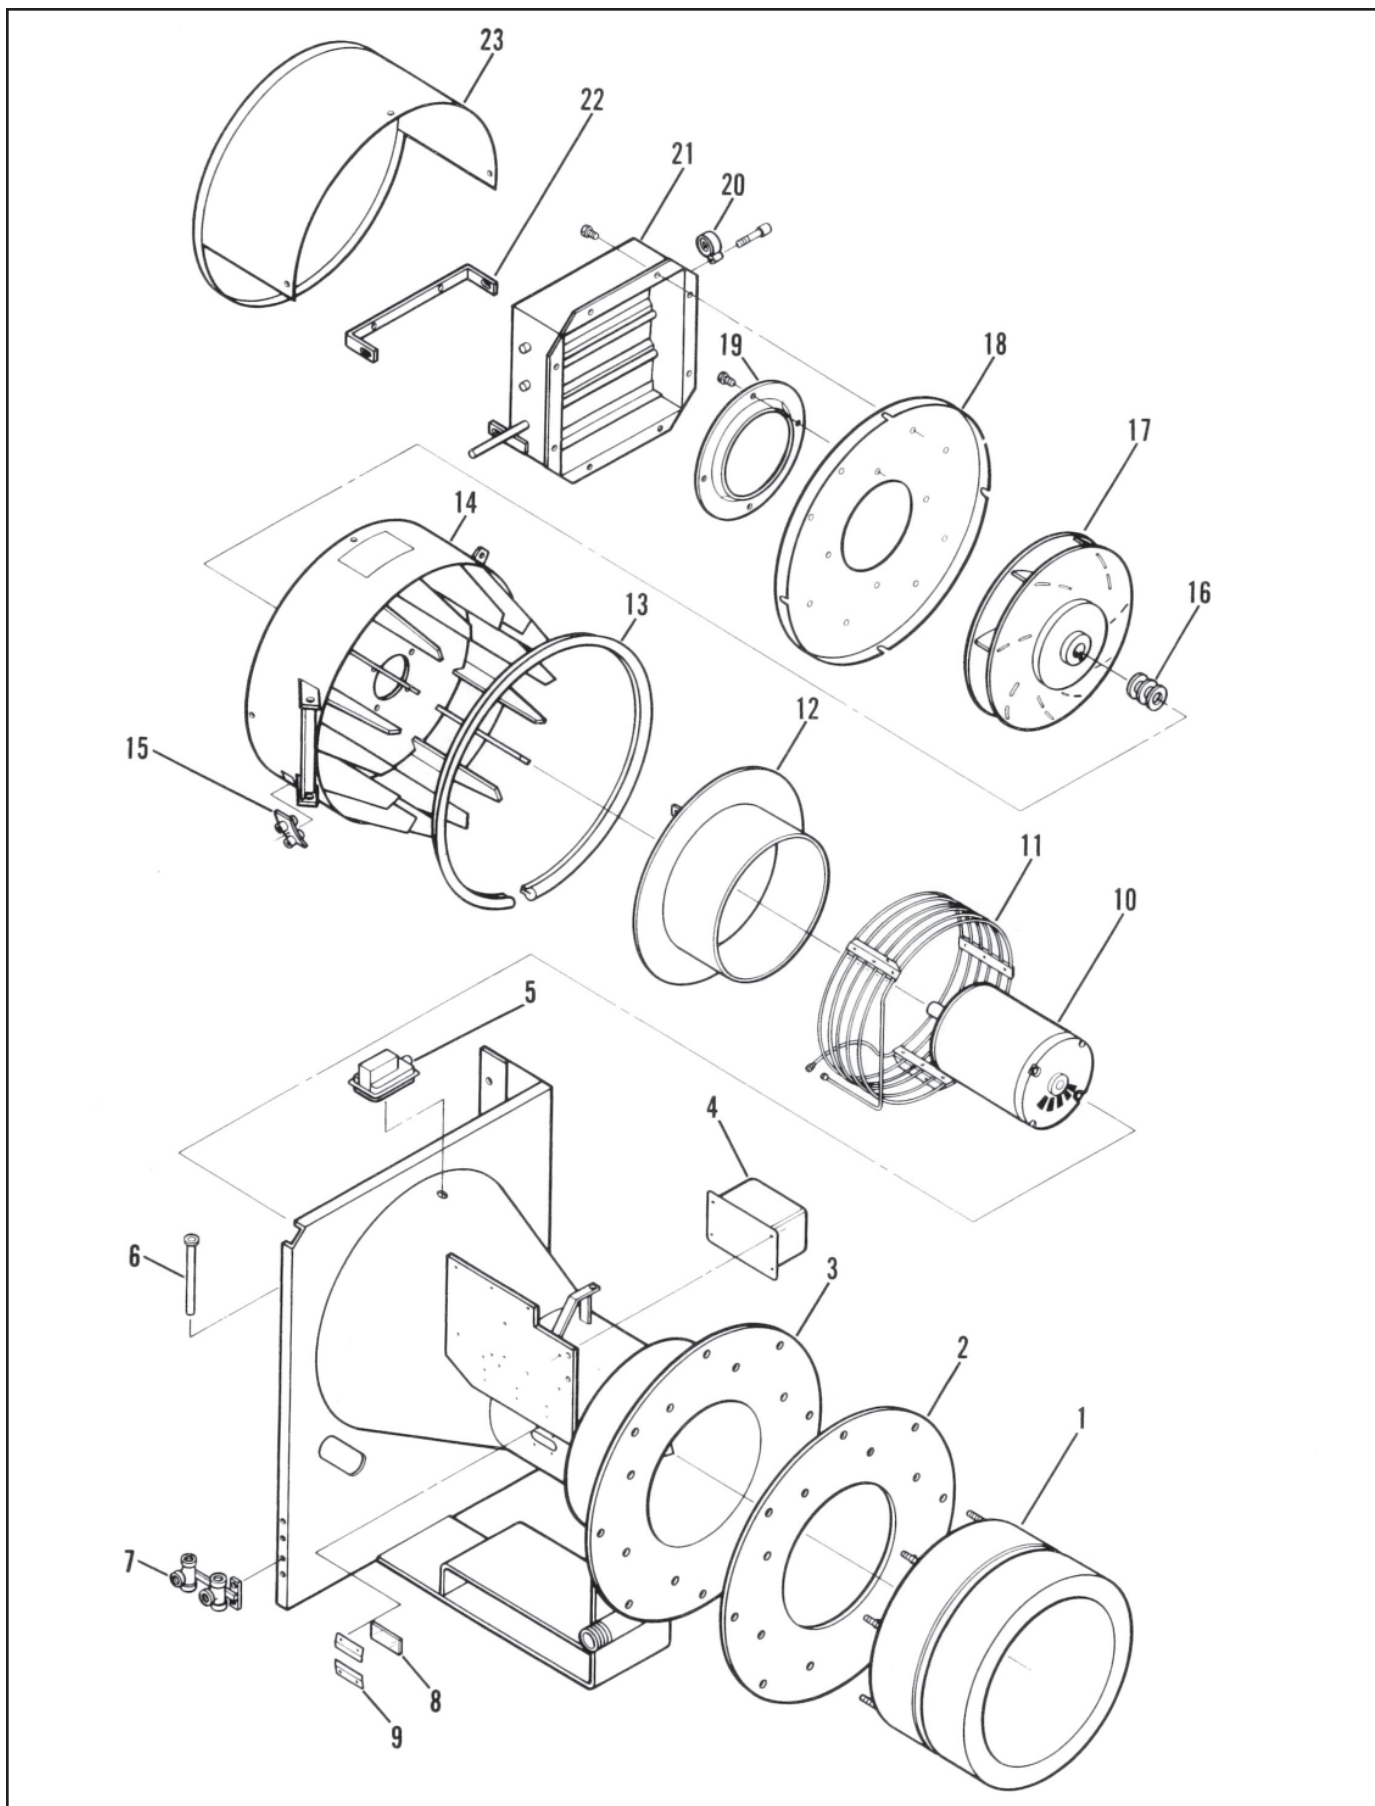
BLOWER HOUSING & BLAST TUBE ASSEMBLIES
